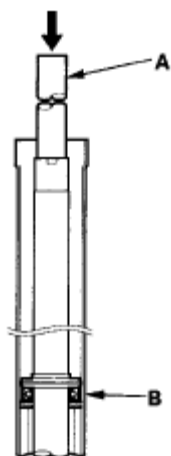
Identifying Socket Wrench Onto Steering Rack
